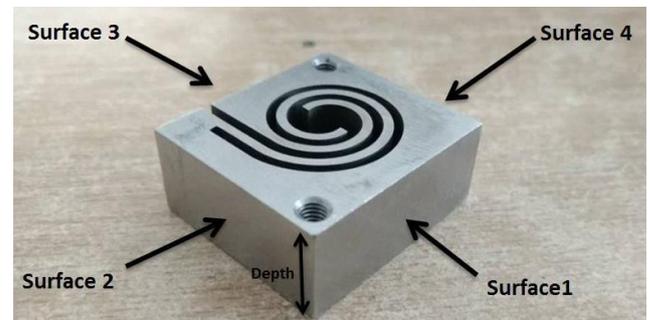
Combustor shows surfaces exposed to atmosphere with thermocouple locations.
